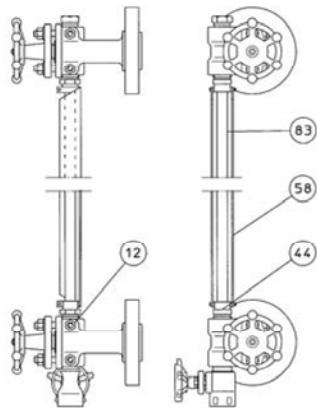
Type BTV-GP11 tubular glass level gauge
